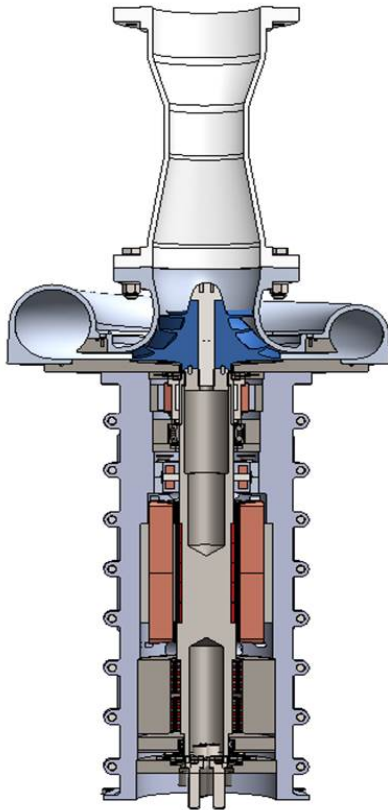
Cutaway configuration of turbo-aerator supported by 5-axis active magnetic bearing system.
